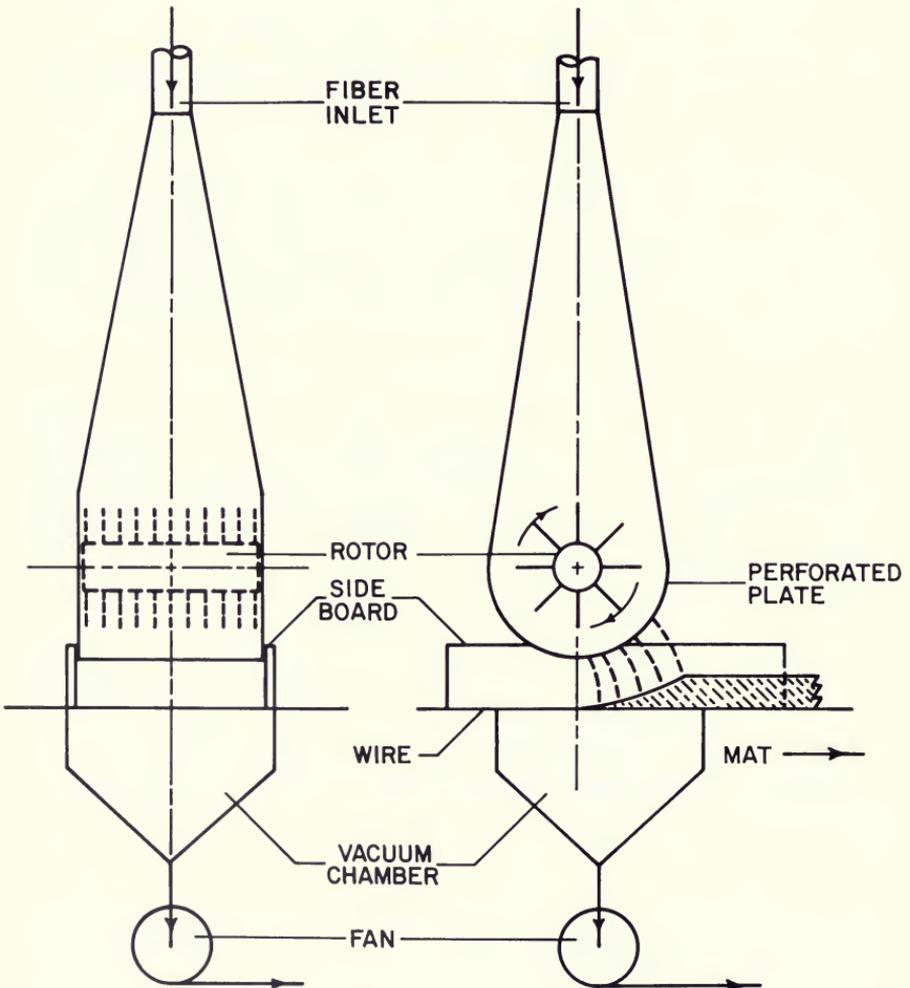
Vacuum forming machine. (Drawing after Robinson 1959.)
